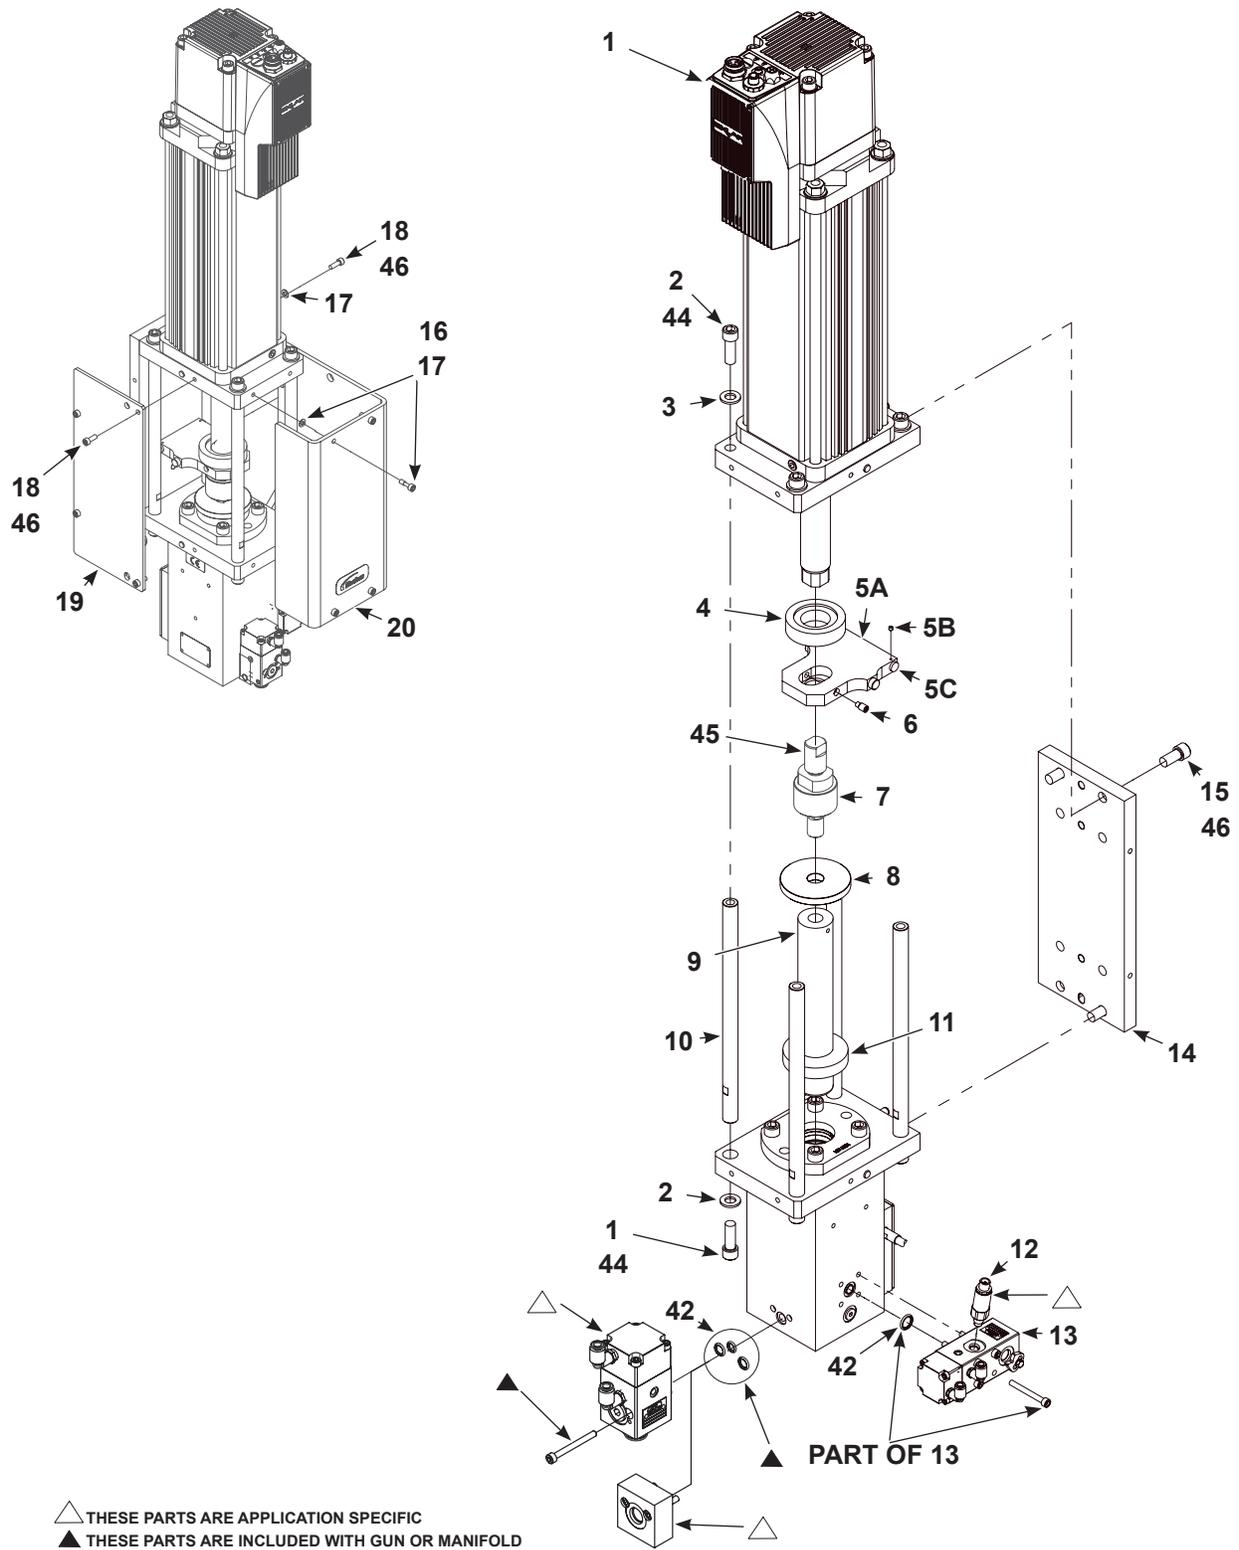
S165 120/240 V Heated E-Net Dispenser Parts
